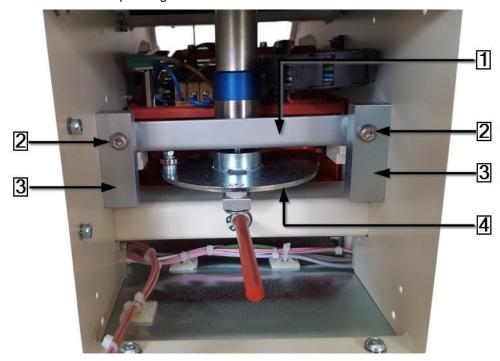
Motor Assembly Position Adjustment (viewed from rear)
